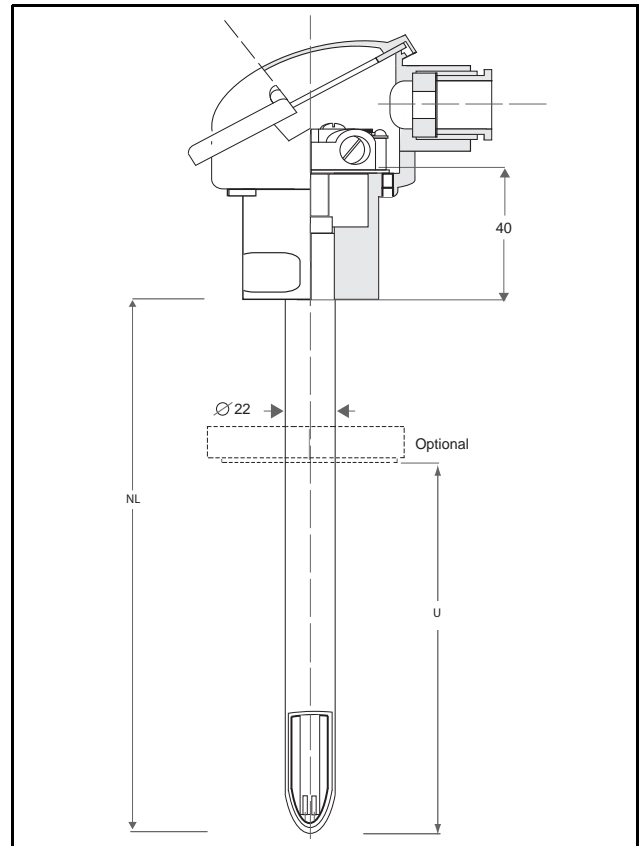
1075 Series Immersion Thermocouples with Metal Protection Tube (Design AM)
